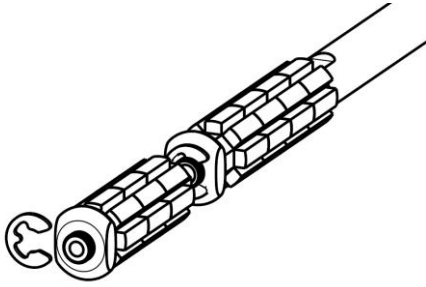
Remove the circlip and replace the inner slide bearing (white) using a suitably small screwdriver. The second slide bearing can't be changed on side! (Only available on a Factory Overhaul)
